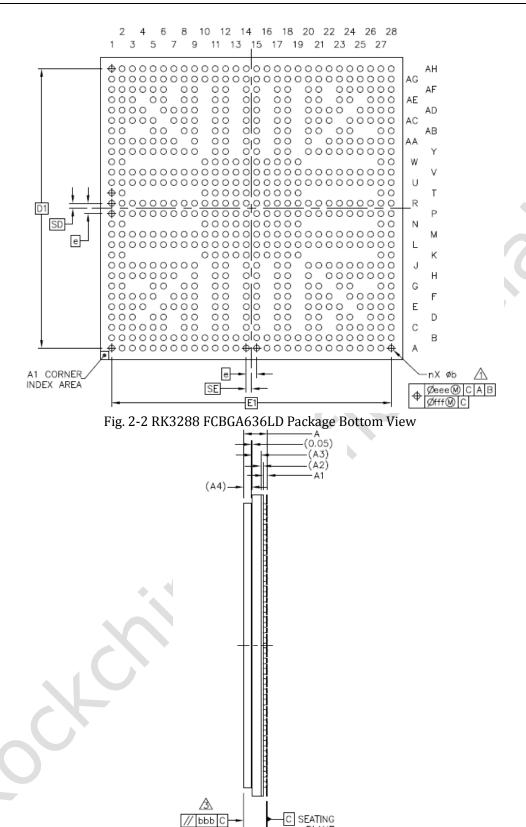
RK3288 FCBGA636LD Package Side View
